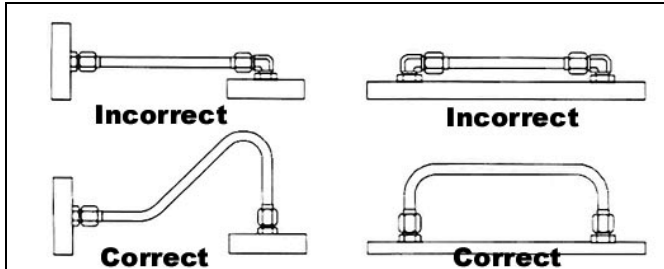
Use bends in hose/tube assemblies to reduce strain on components and to compensate for tolerance stack-up in assemblies.
